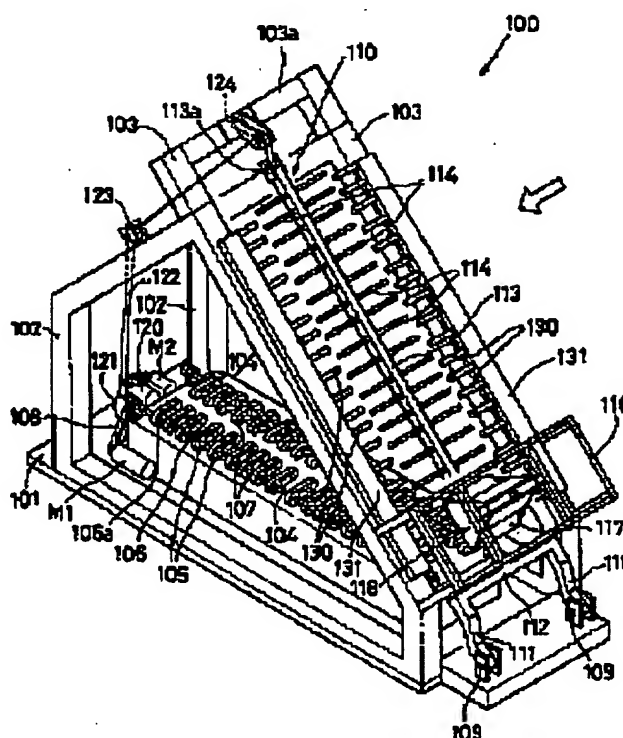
# PLATE MATERIAL CARRYING CONVEYOR AND SEGMENTED CEMENT PLATE MANUFACTURING DEVICE HAVING ITS CARRYING CONVEYOR
